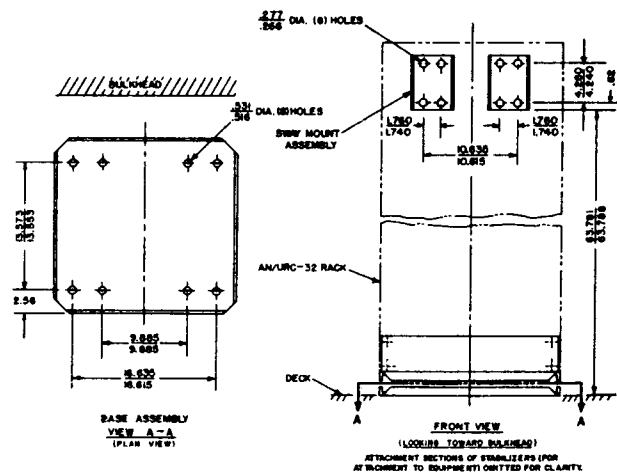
Mounting Hole Location for Earlier AN/URC-32 Version
